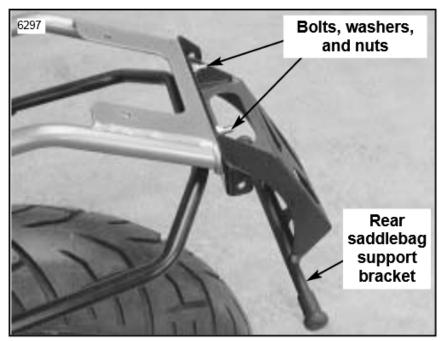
Attaching Saddlebag Supports (tail section removed for clarity)
